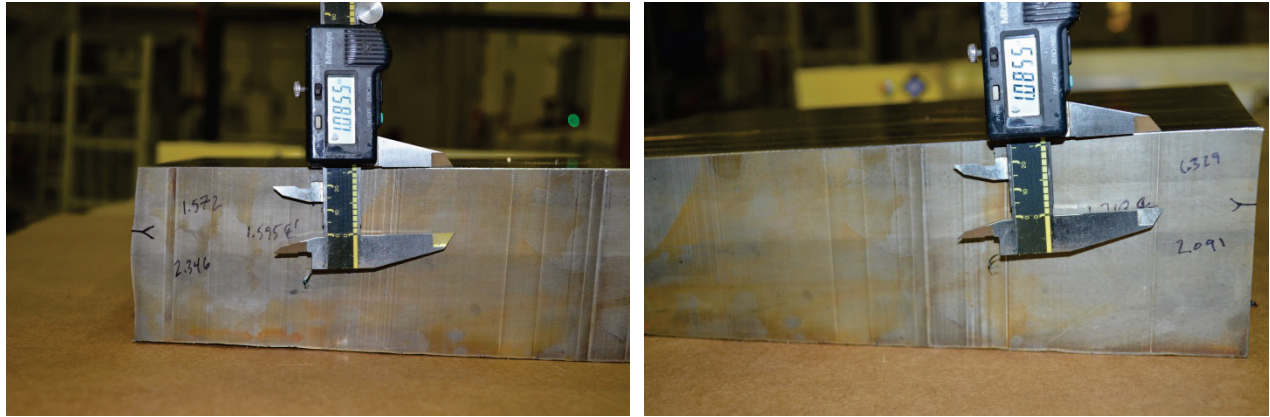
Partially milled CF block, showing centered weld on left and right edges of block [17].
